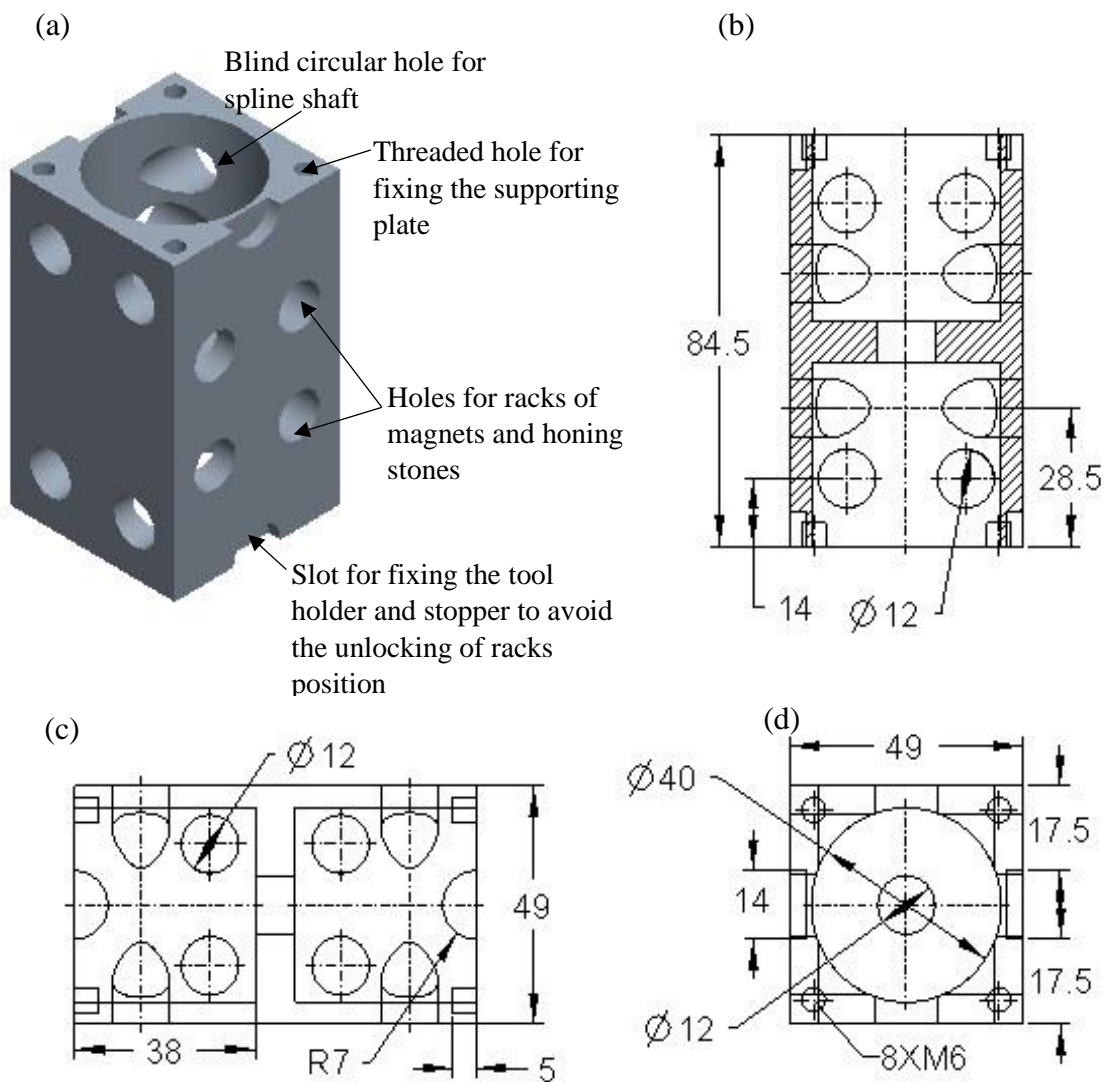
(a) 3-D view, (b) sectional front view, (c) projected side view, and (d) projected top view of the CAD model of mandrel for its fabrication.
